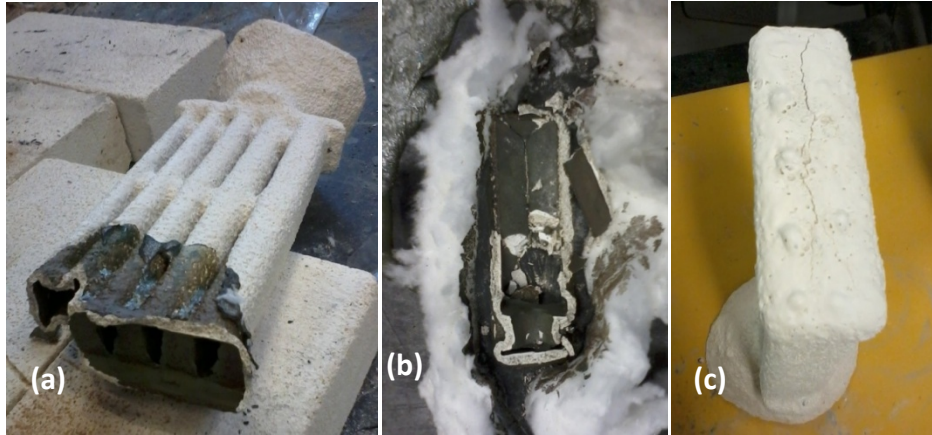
3: Failed mould: (a) top remains (b) bottom remains (c) Typical crack
